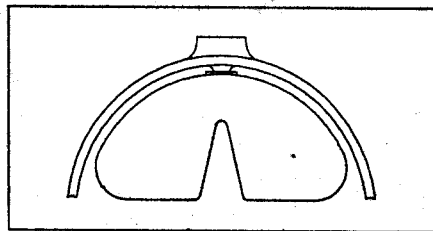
Cover plate of electrical reed vibrator in alignment with inside diameter of Proving Ring.
